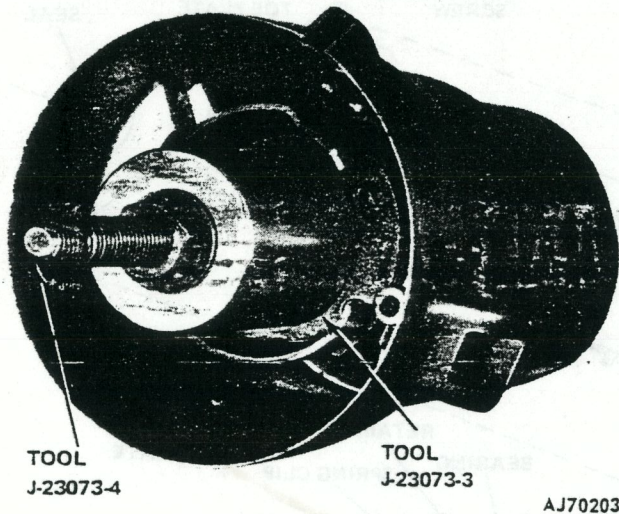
J-44 Pulling Shift Tube into Shift Bowl
